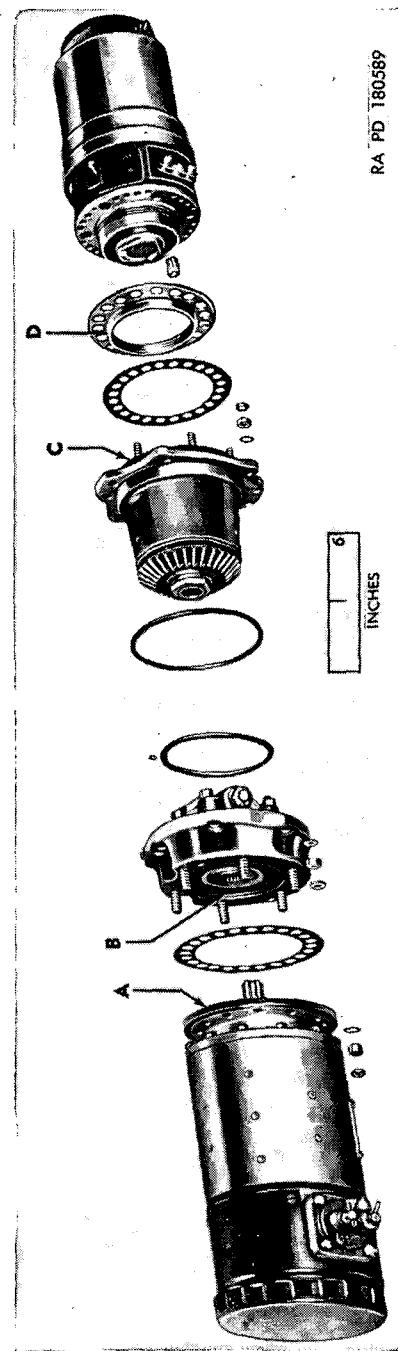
Repair and rebuild standard points of measurement for starter and generator mounting pilots.
